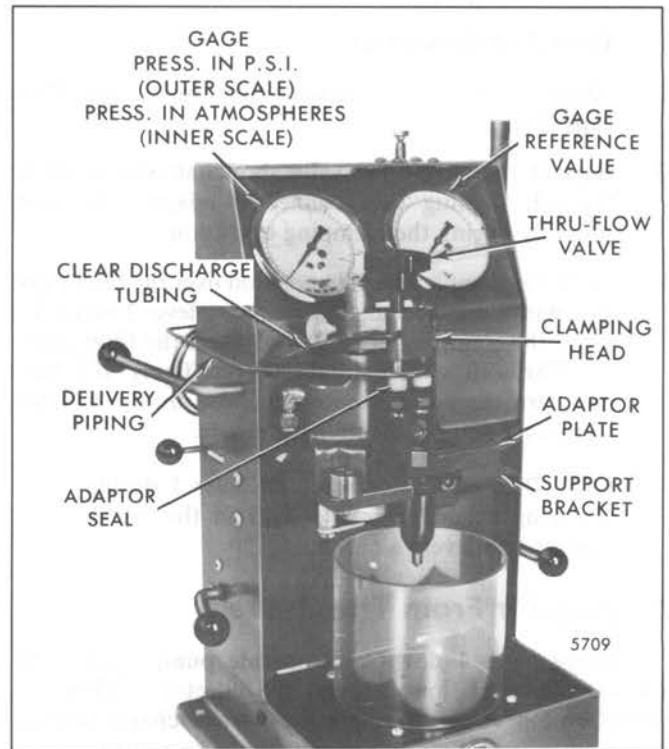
Injector Installed in Tester J 23010-A with Clamping Head
